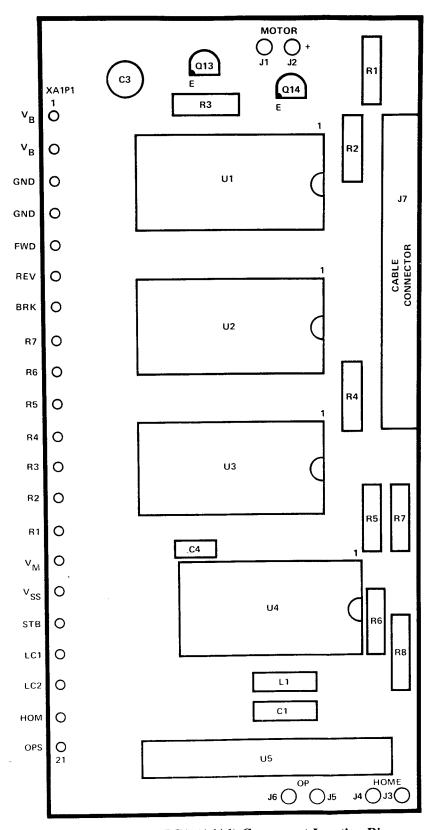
Printer PCA (A4A1) Component Location Diagram
